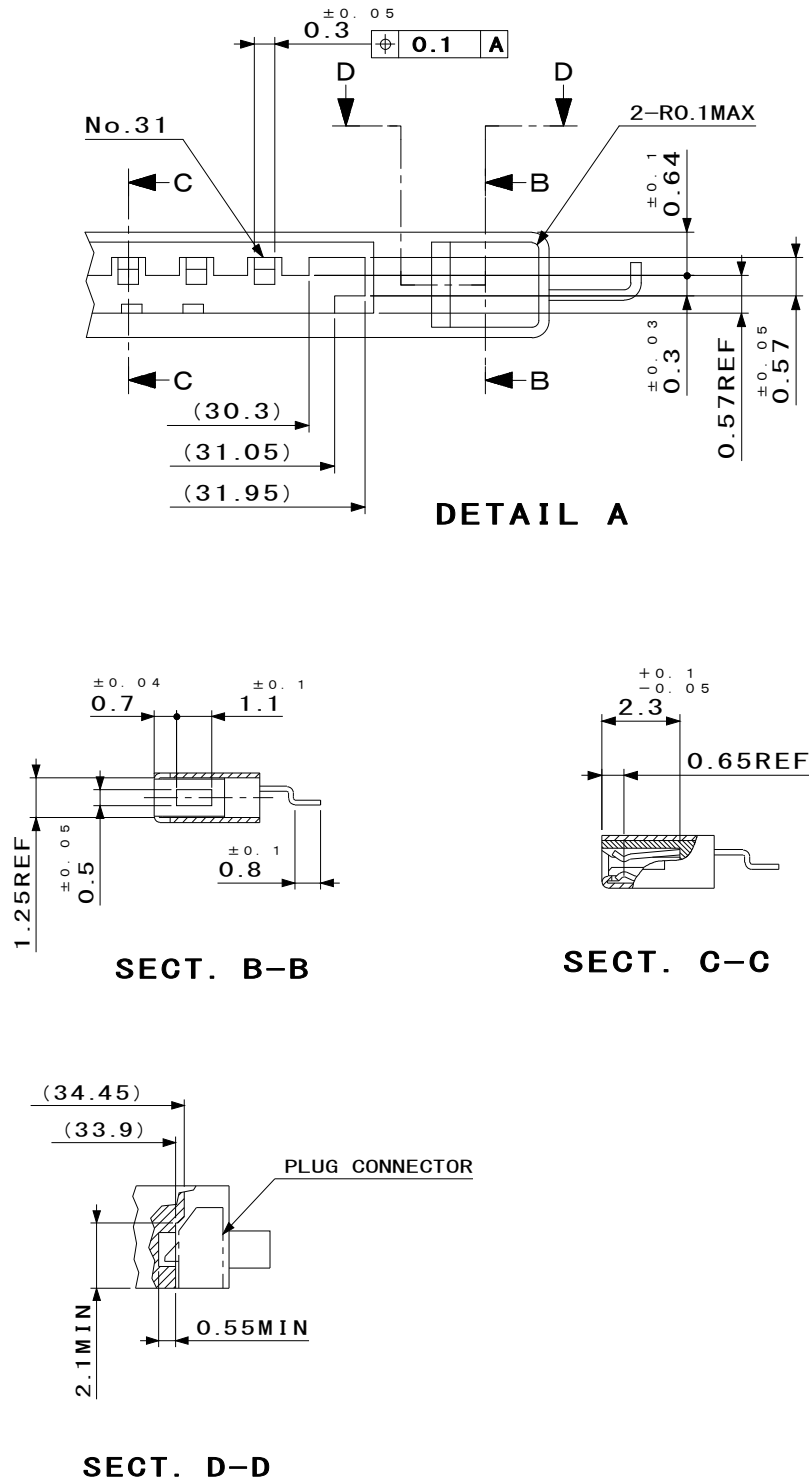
Panel-side Internal PCB Mount Receptacle Connector (in mm) – 2
